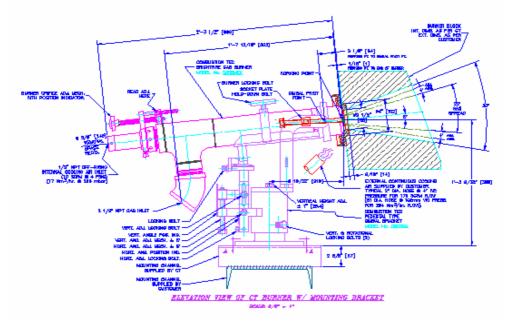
Brightfire Underport Burner and Bracket Layout with Block Sealing Arrangement.
